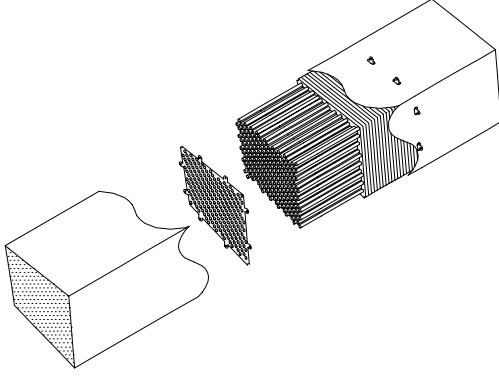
A view of a barrel module showing a straw alignment plate, the straws, stacks of fiber radiator, and the shell.
